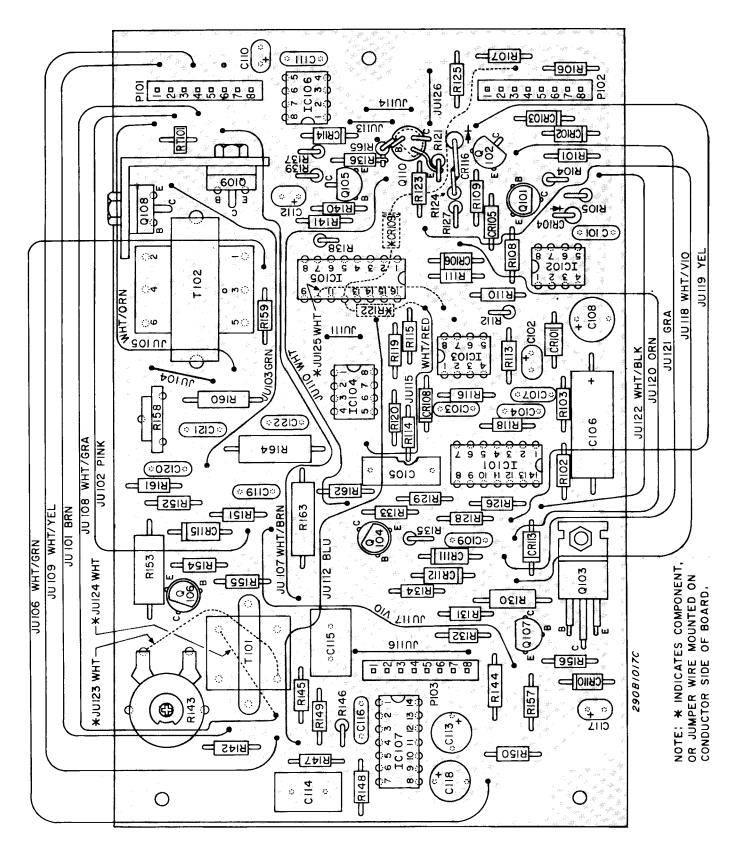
Siren Module Main Circuit Board Parts Location Diagram.
